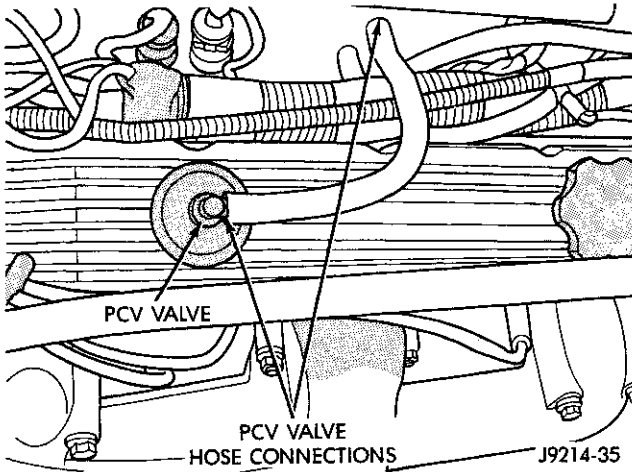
PCV Valve Hose Connections—3.9L/5.2L/5.9L Engines—Typical
